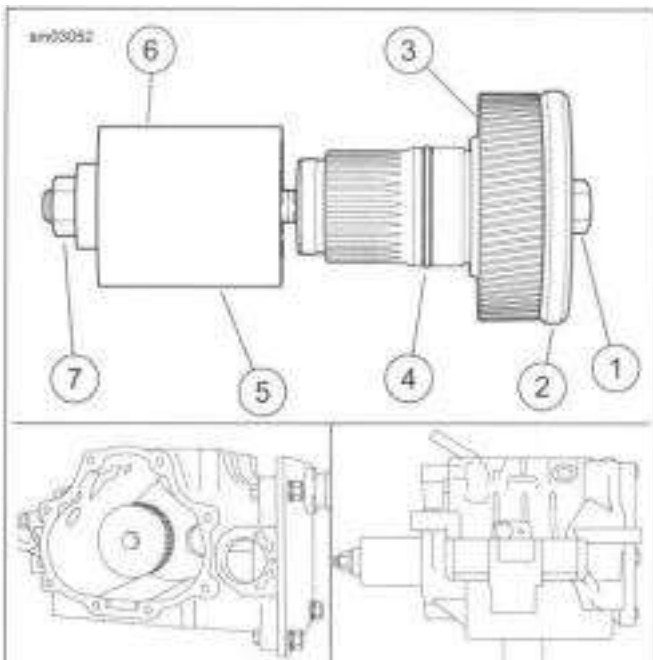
Installing Main Drive Gear Bearing (Typical)
